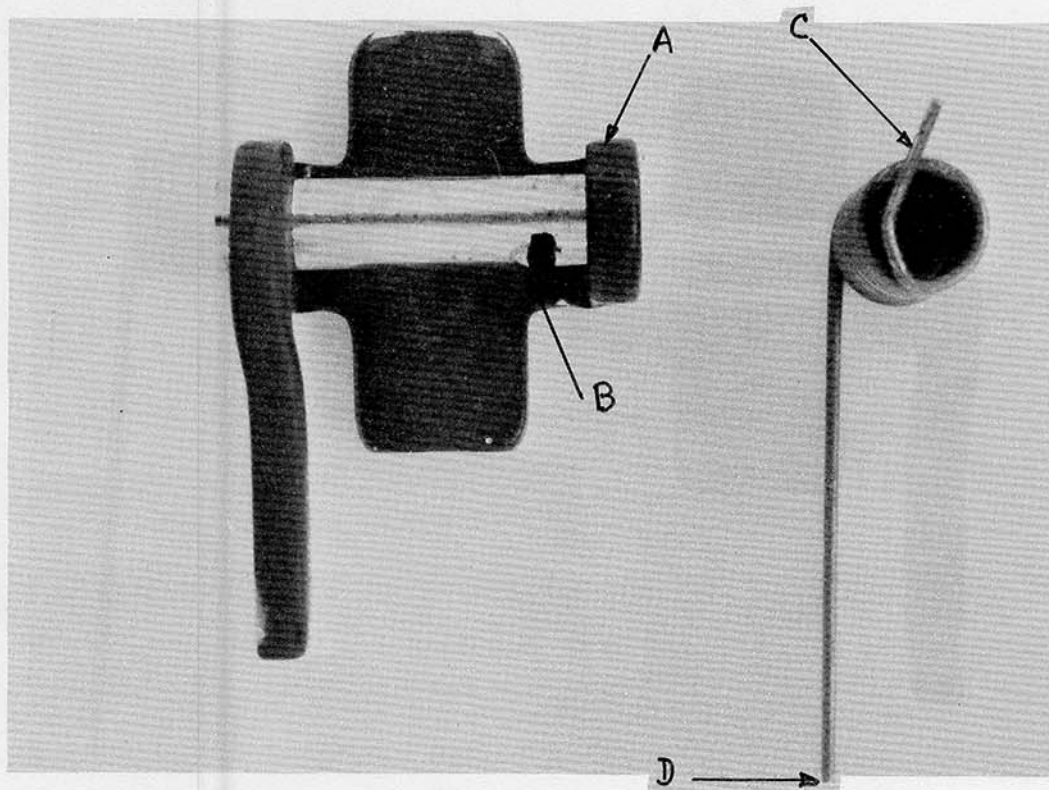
Colt M16A1 rifle SN 6418244 automatic sear assembly partially disassembled.
